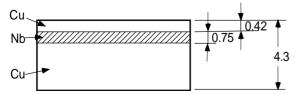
Designed cross sectional view of Cu/Nb/Cu sandwiched clad sheet.
